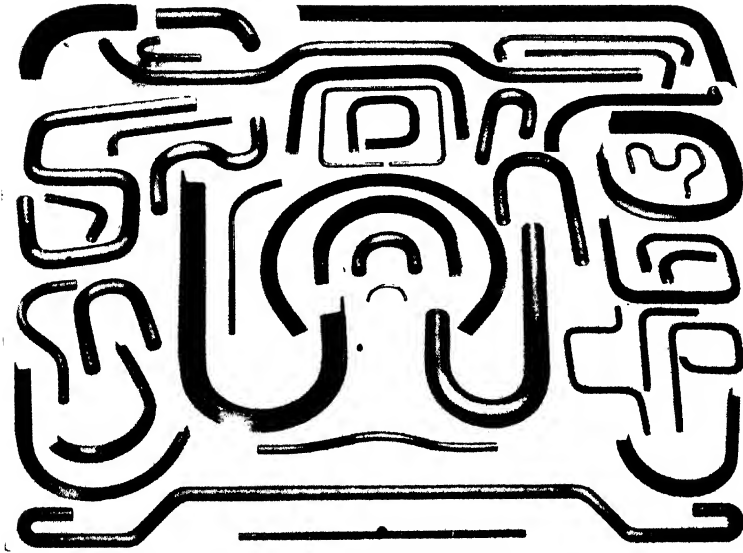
GROUP OF TYPICAL BENDS PRODUCED BY MACHINE
